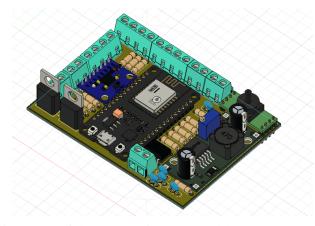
Top of the PCB Design. The modular components are all placed on one side of the board for efficiency.
